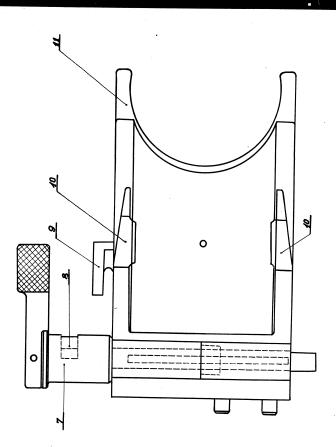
BREECHBLOCK ASSEMBLY (WITHOUT THE FRONT PLATE)
